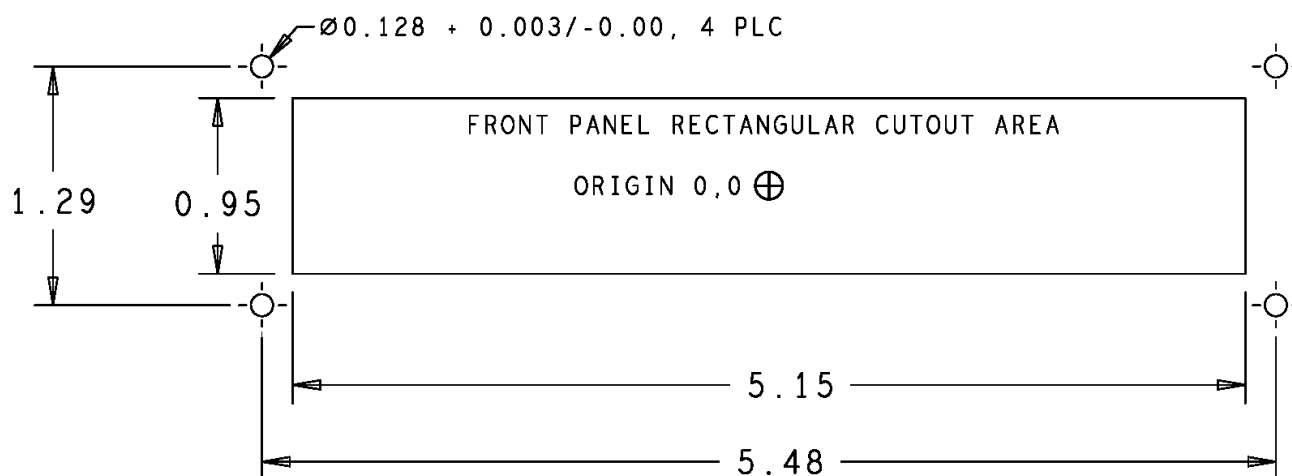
MOUNTING HOLE DIMENSIONS, LOCATIONS AND RECOMMENDED CUTOUT AREA
